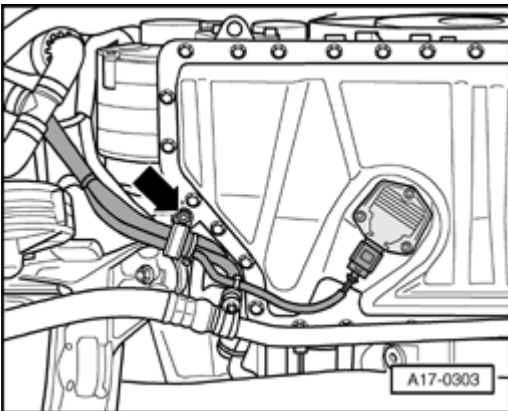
Removing Guide On Lower Section Of Oil Pan
